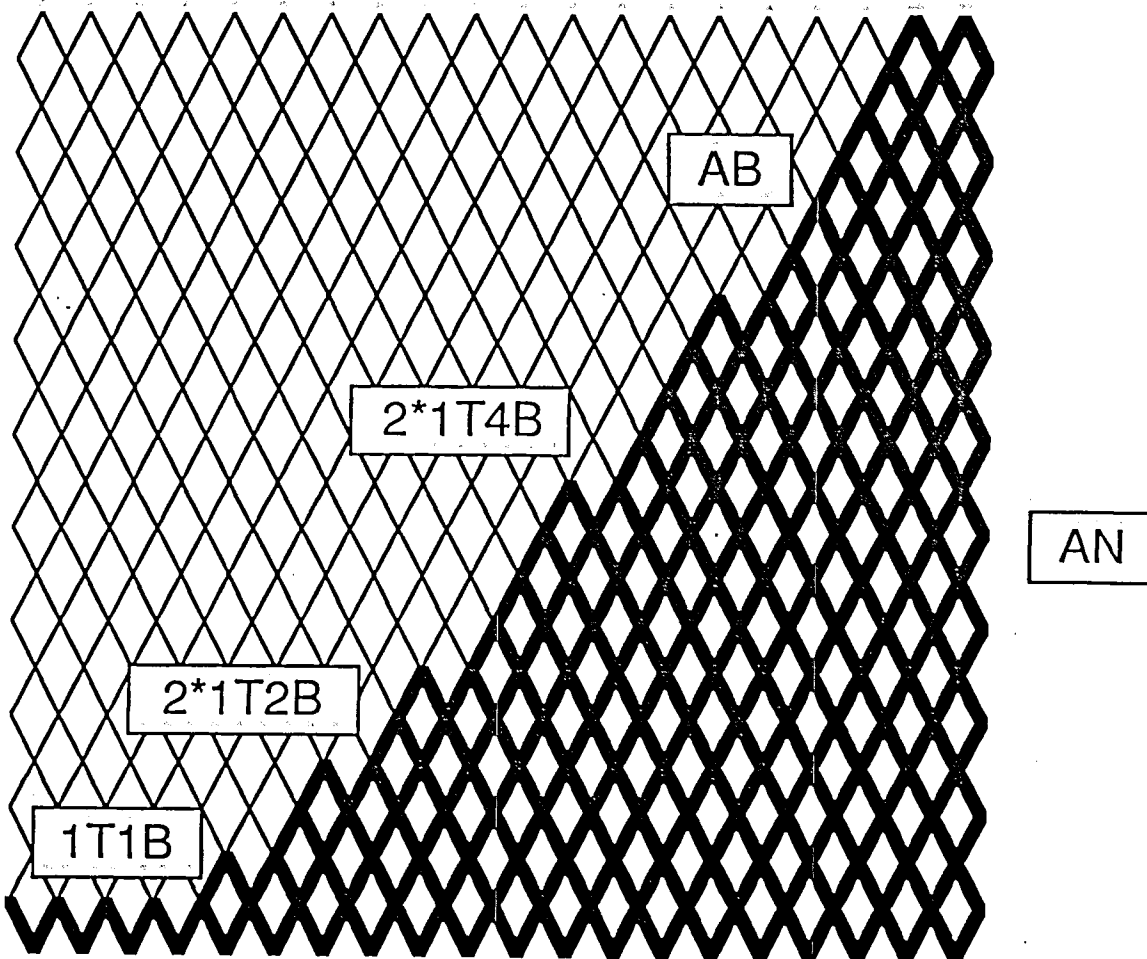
Detailed layout of cuts with varying cutting angle in a wing section.
